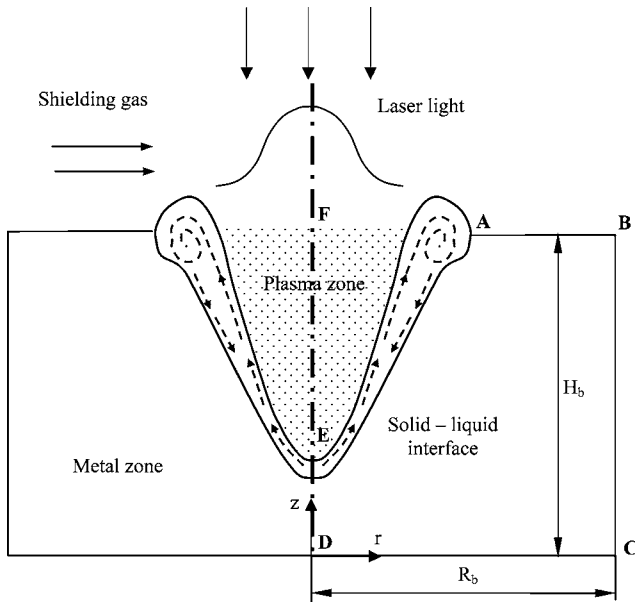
Schematic sketch of a pulsed laser welding process
